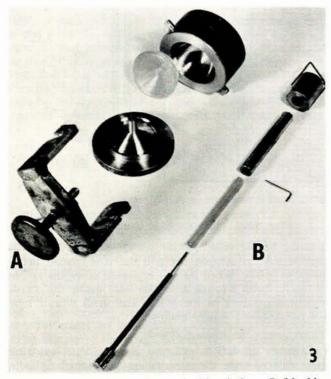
A. Mould for casting vaginal hemisphere. B. Mould for casting uterine tube.
